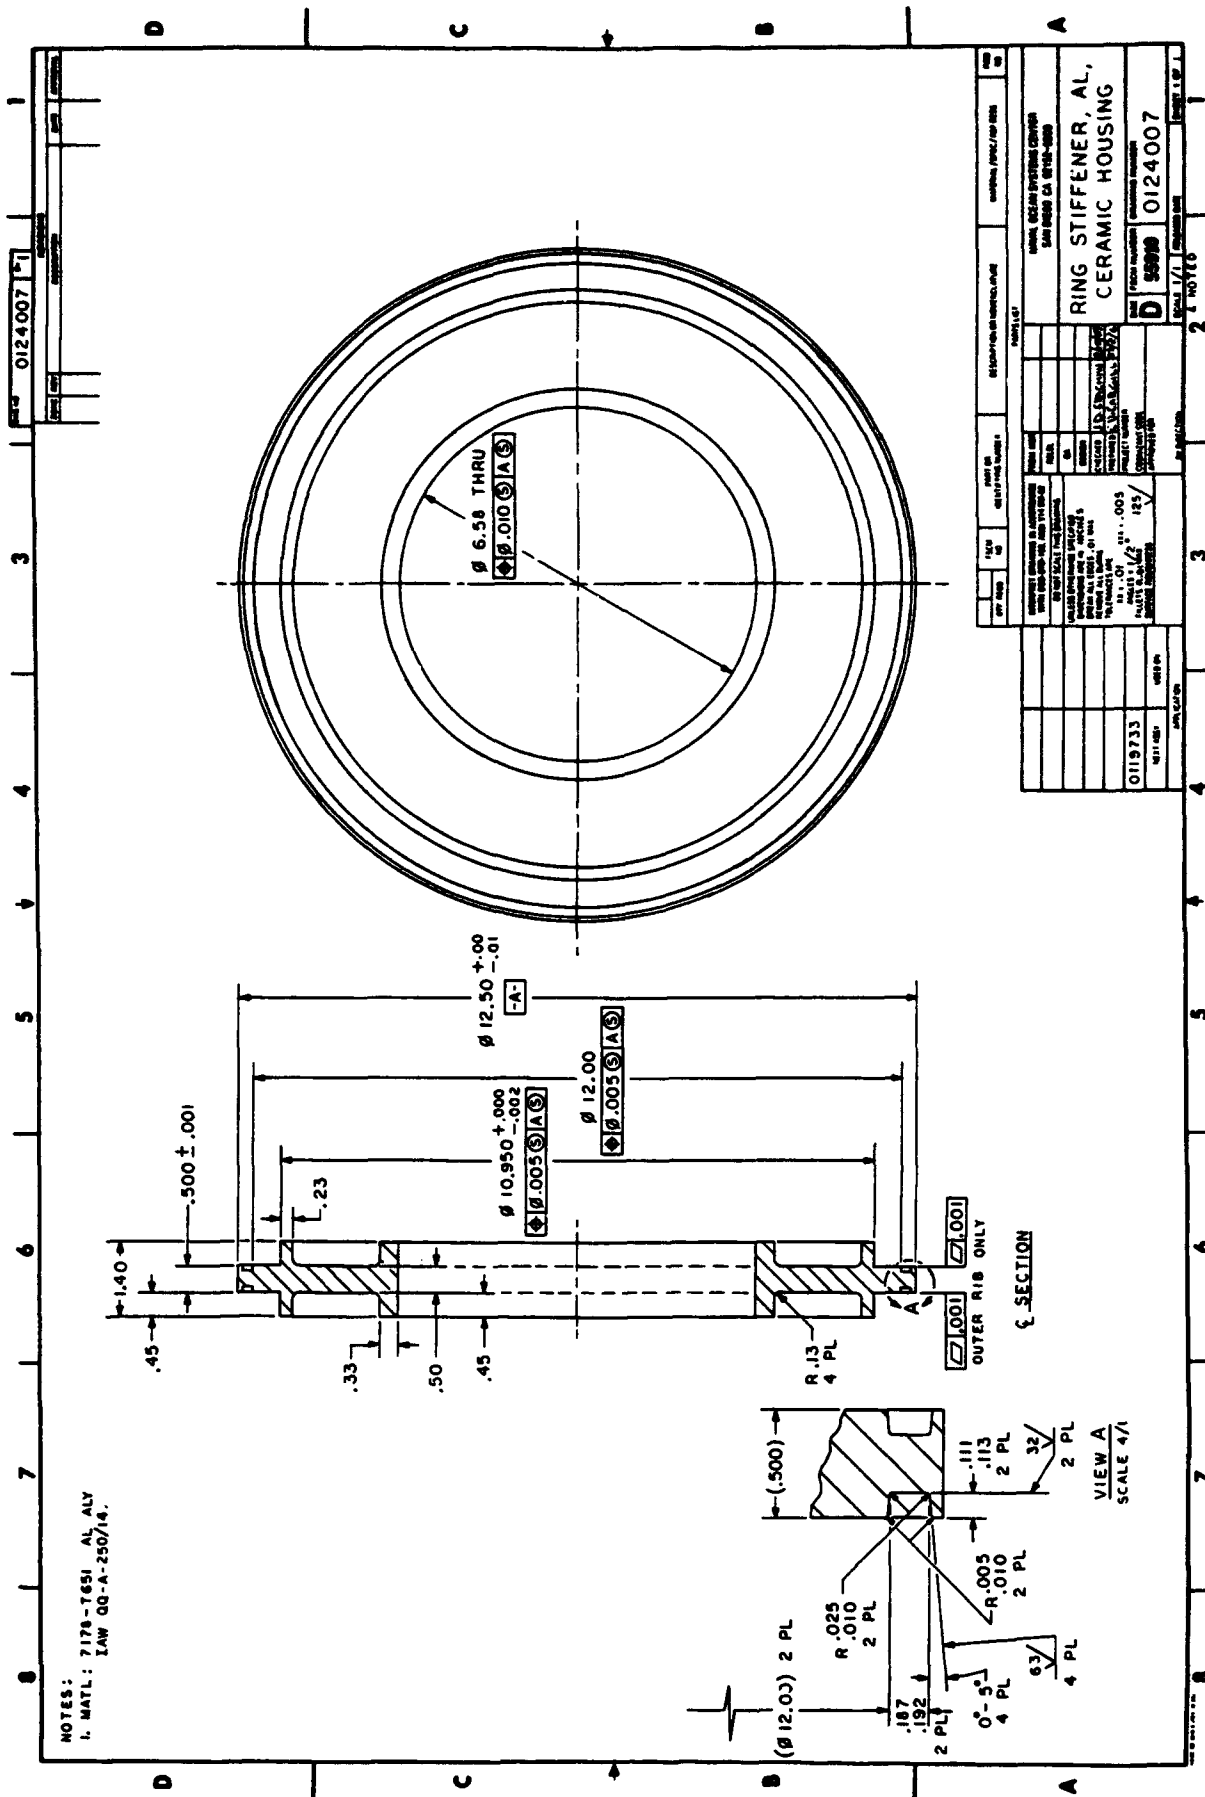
Aluminum ring stiffener DWG 0124007; fabrication drawing.
